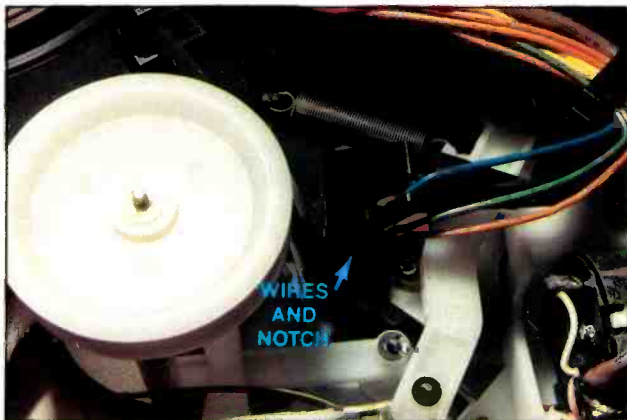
Move the harness wires out of the notch in the plastic reel assembly bracket.
